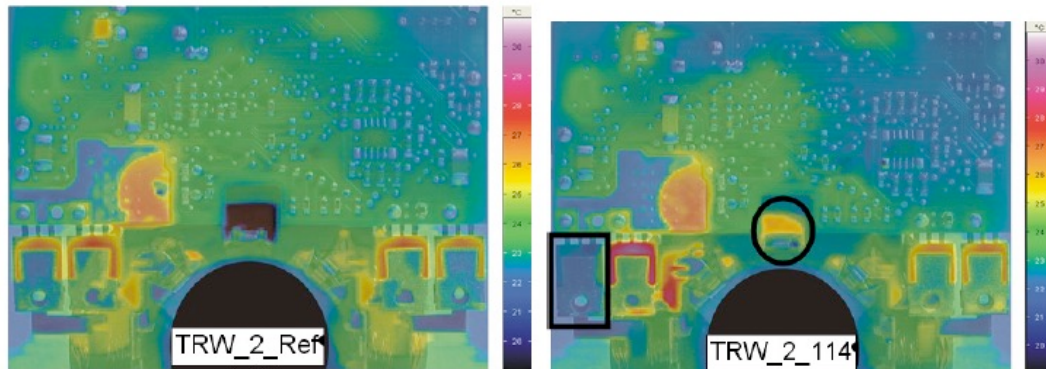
Thermal inspection of a circuit board: reference standard (a), component with defects (b).
